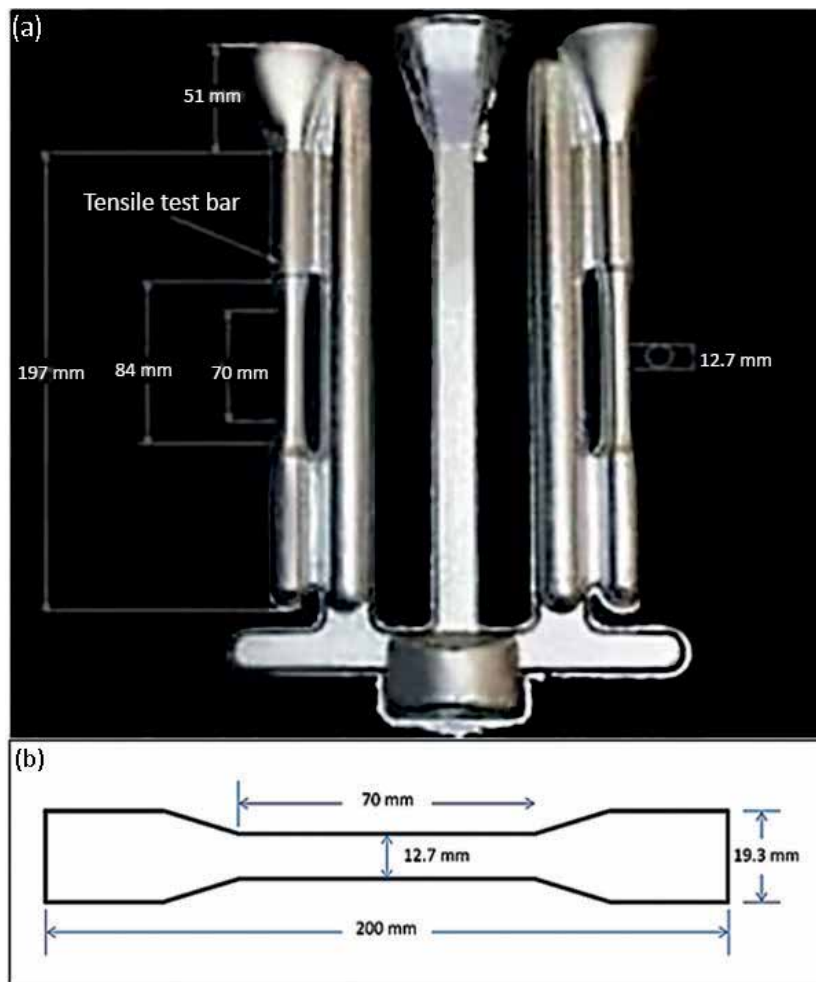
(a) ASTM B-108 permanent mold used for casting tensile test bars and (b) dimensions of the tensile test bar (in mm).
